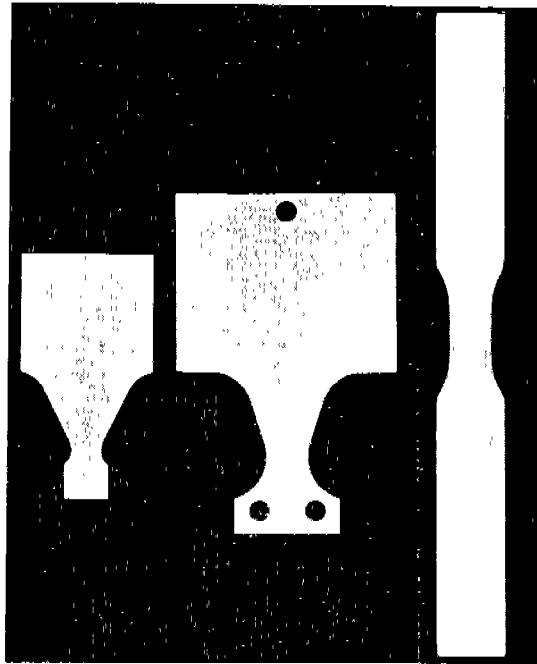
Specimens for bending fatigue testing in UMG (left) and Sonntag (middle) machines, for axial fatigue testing in Amsler high frequency pulsator (right). 0.7x
